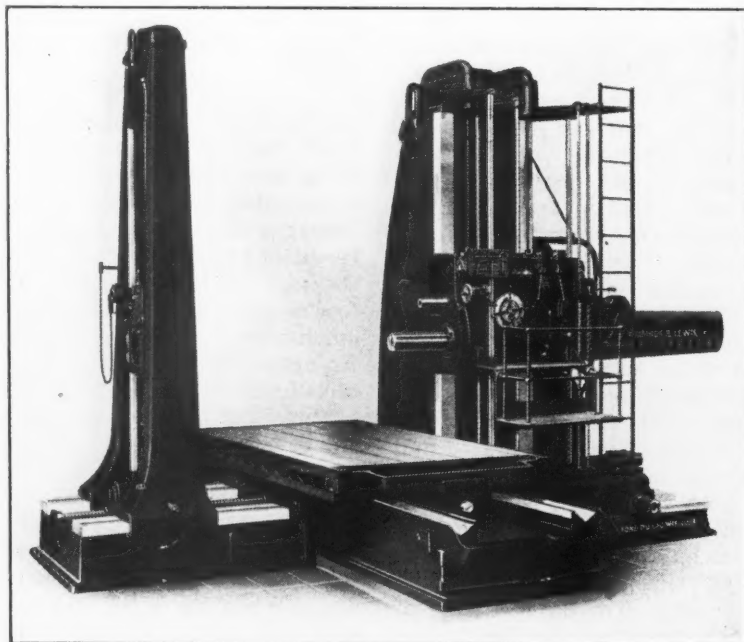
Giddings & Lewis Planer-type Boring, Drilling, and Milling Machine with an Auxiliary High-speed Spindle
